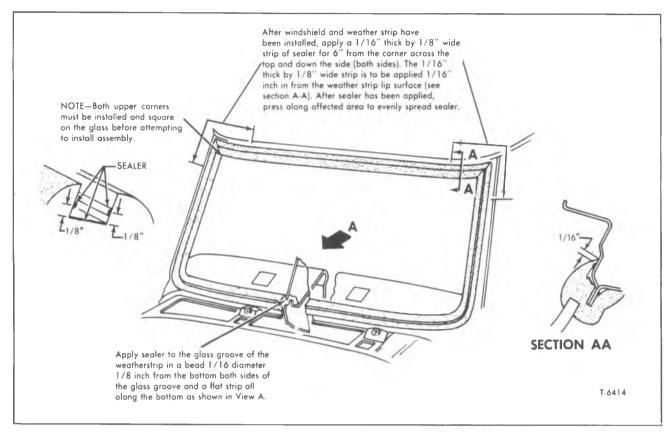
Windshield Glass, Weatherstrip, and Sealing (Conv. Cab Model)
